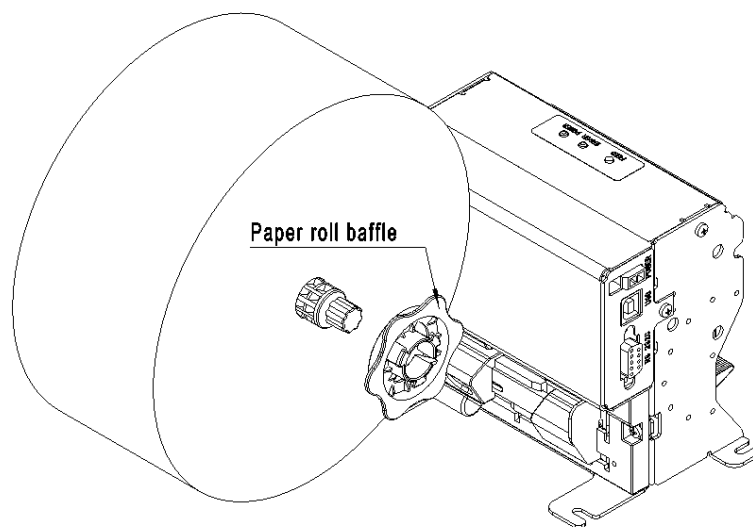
Install the paper roll onto the paper roll shaft
